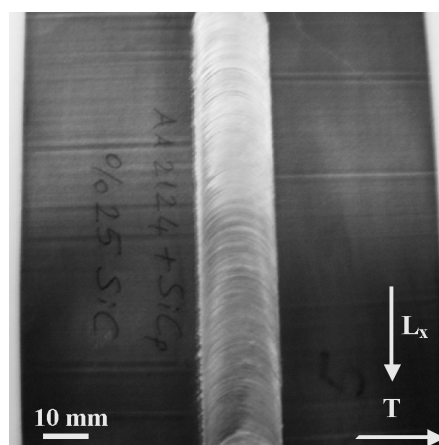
Top view of friction stir welded AA2124/SiC/25p-T4 MMC plates
